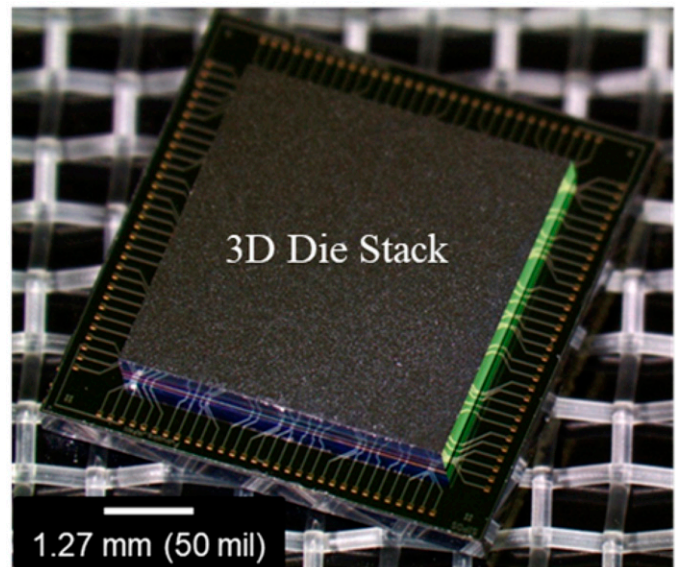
2.5D/3D Copper pillar assembly based on TCB.
